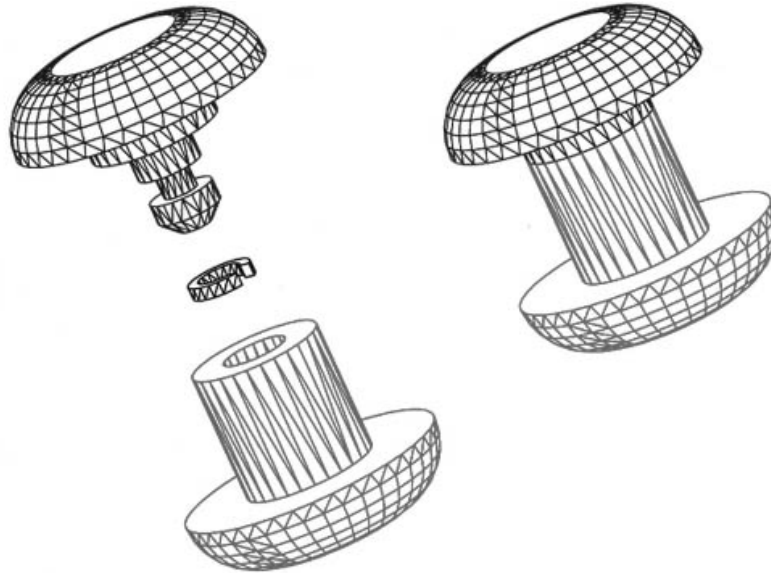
Glass Rivet with internal locking ring, shown unassembled (left) and assembled (right).
